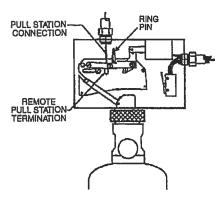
Single Cylinder Installation Using Model MCH3/ECH3/NMCH3 Control Head
